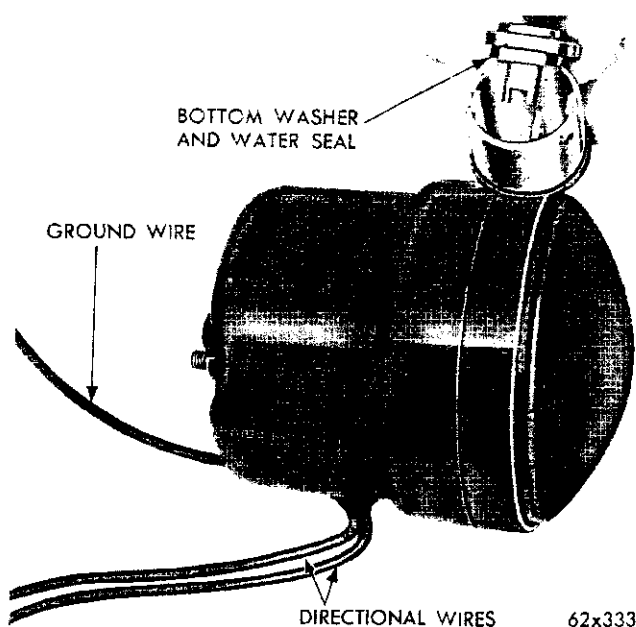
Removing Bottom Insulator and Water Seal Washer
